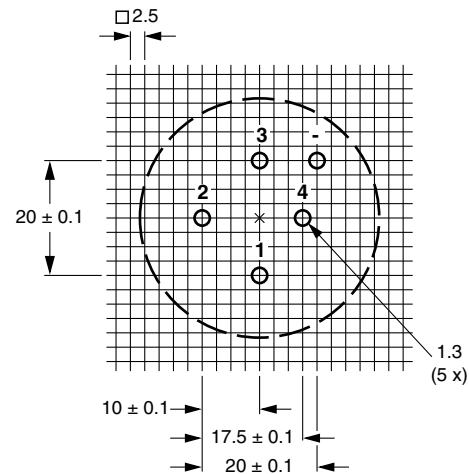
Mounting hole diagram viewed from component side (case Ø D = 40 mm)
